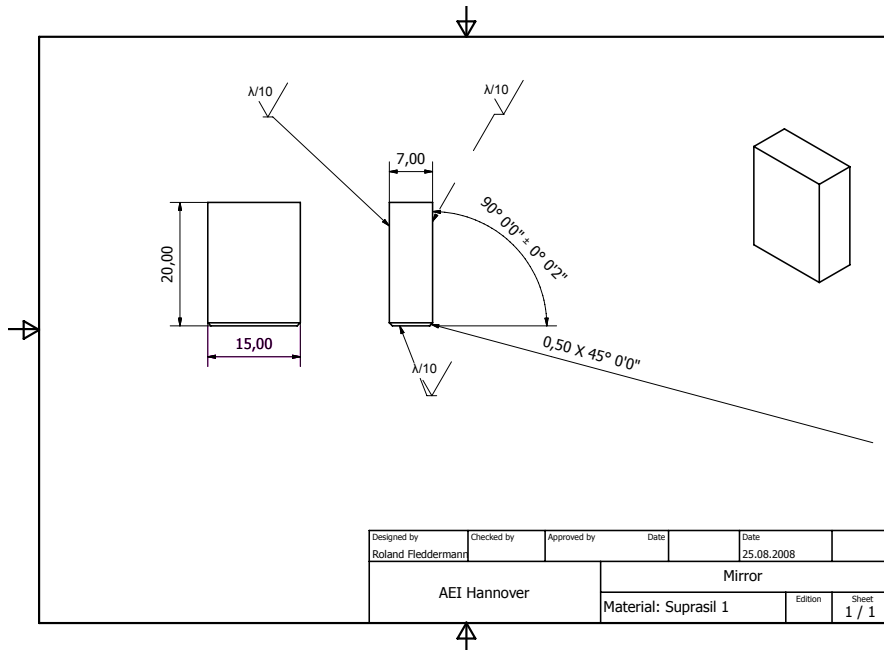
Technical drawing for the specification of the mirrors used for bonding. All dimensions are given in mm.
